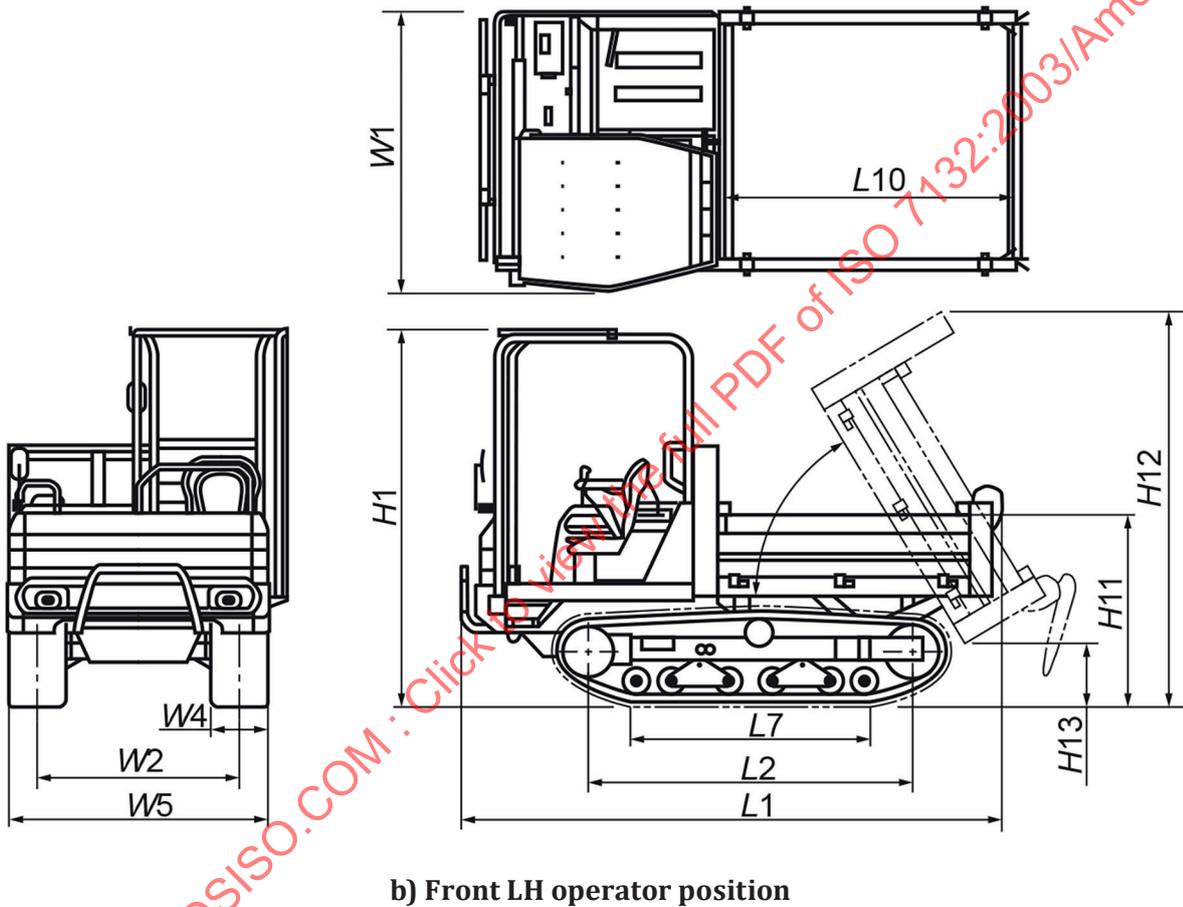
Dimensions of crawler compact dumper — Front operator position”
